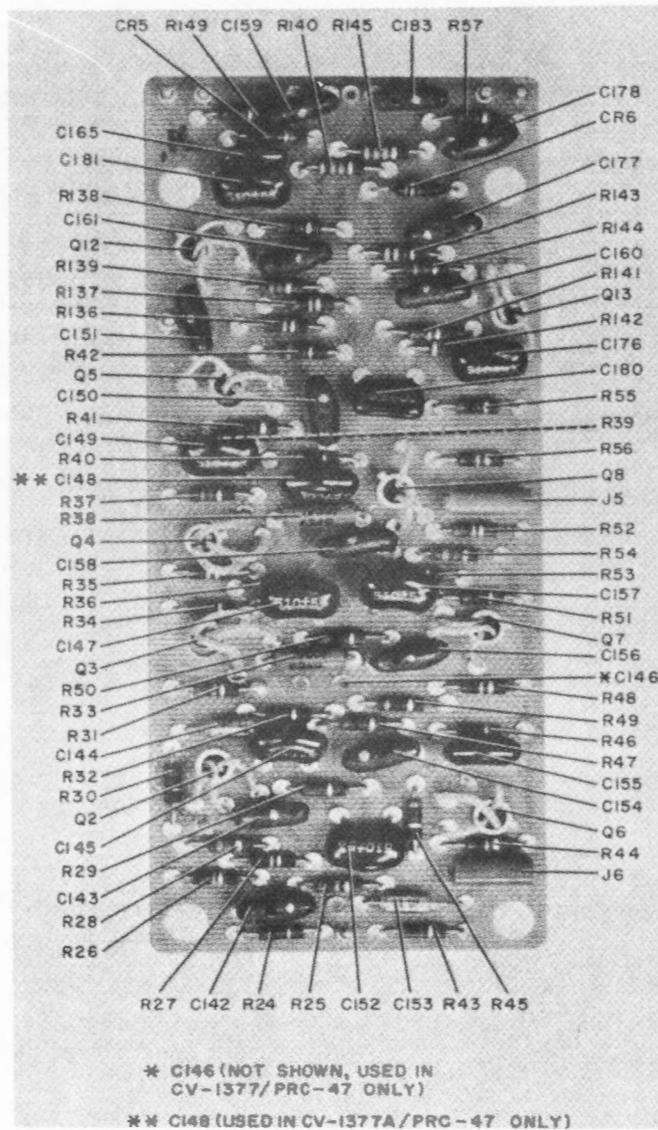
Signal Data Translator CV-1377()/PRC-47 (A3), Card Assembly E47, Parts Location
